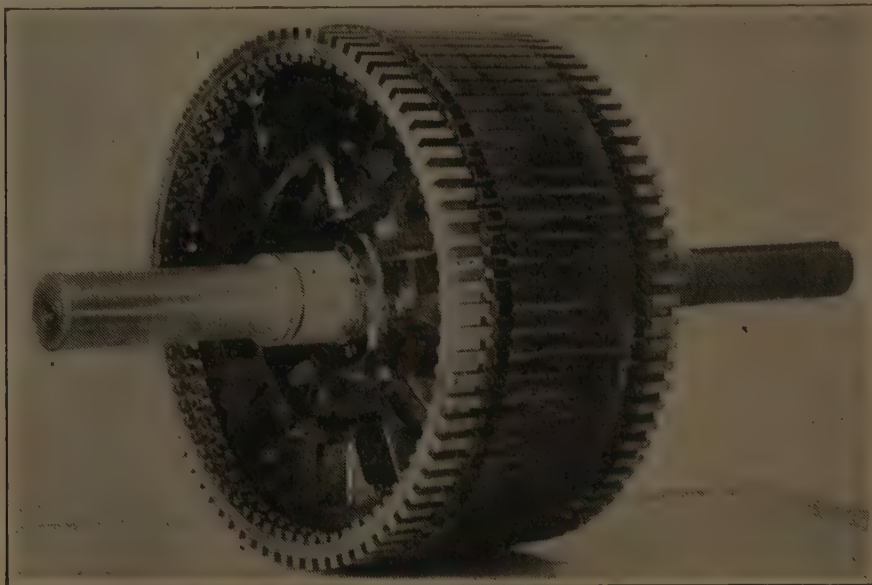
FIG. *D*.—Squirrel-cage rotor with bars tap-bolted to machined end rings. This construction is shown in Fig. *B(b)*.
